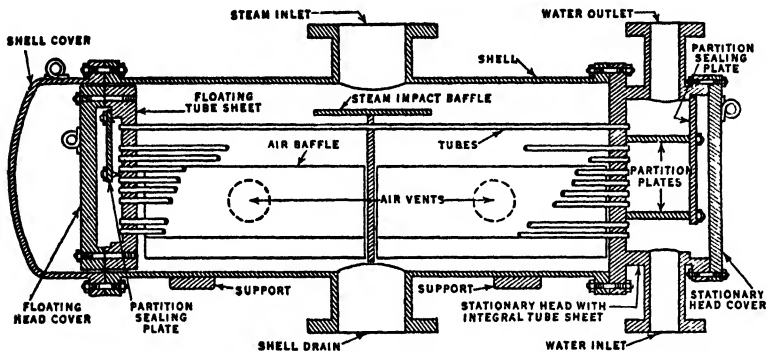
Diagrammatic sketch of a typical Griscom-Russell straight tube closed feed-water heater, showing partition sealing plate in water heads.
